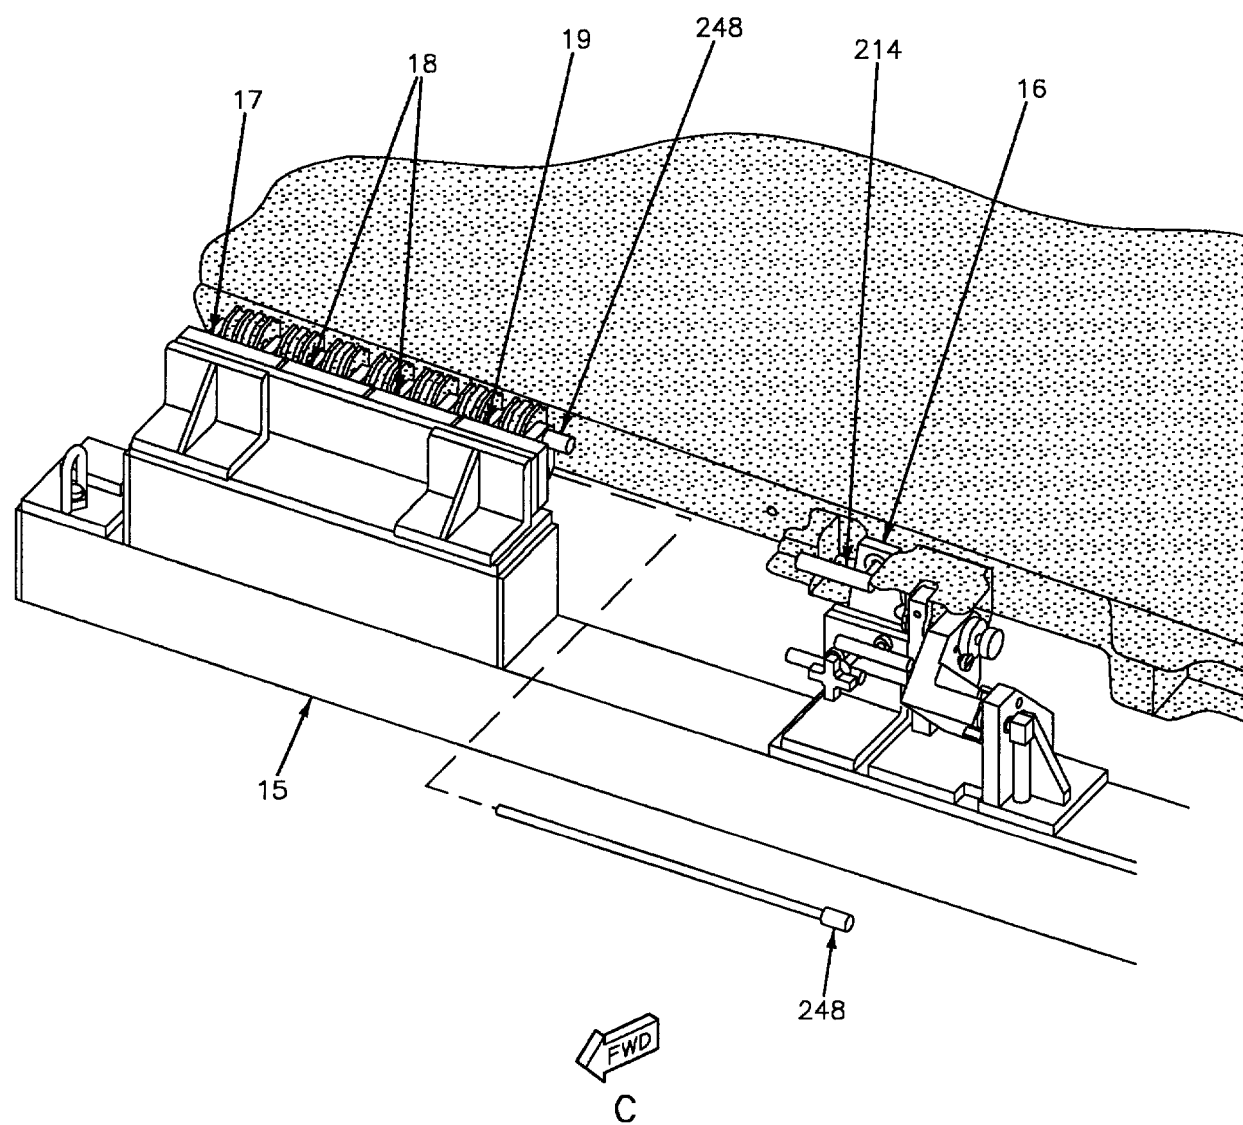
Locating Tool on Outer Wing (Sheet 3)
